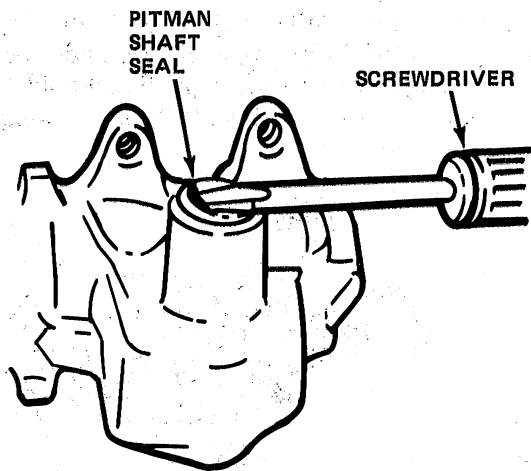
K-11 Removing Pitman Shaft and Wormshaft Seal
